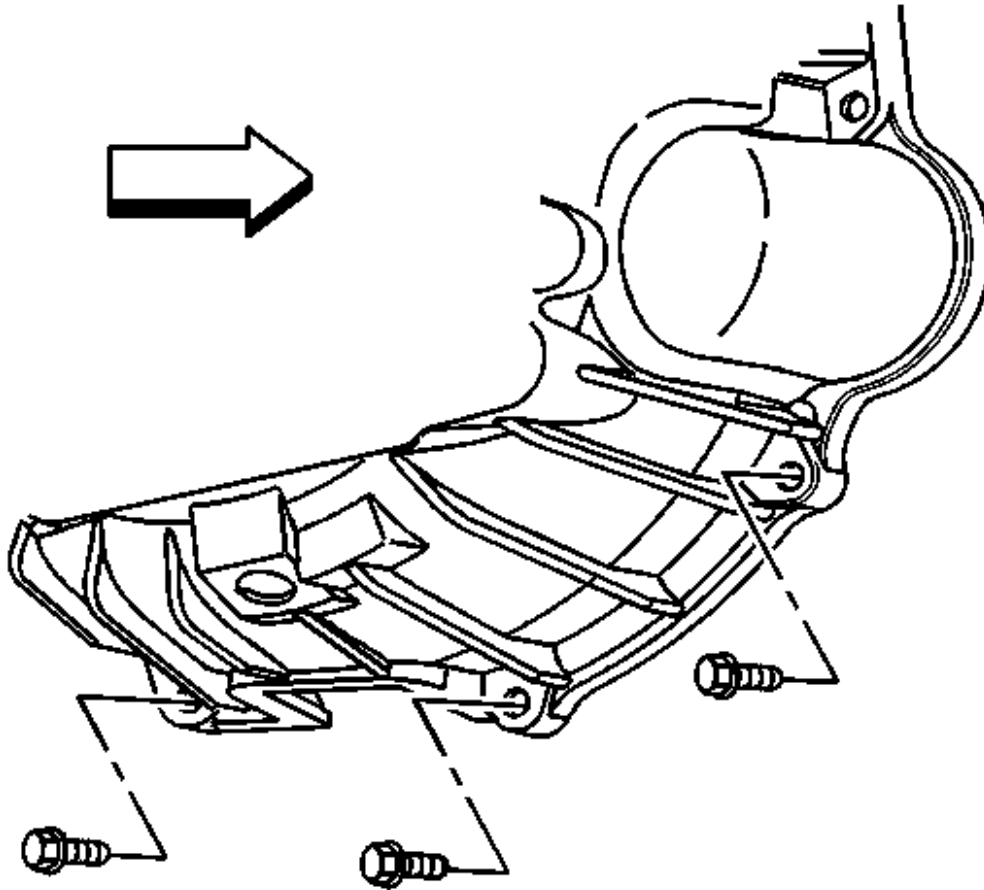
Identifying Transmission To Oil Pan Bolts
